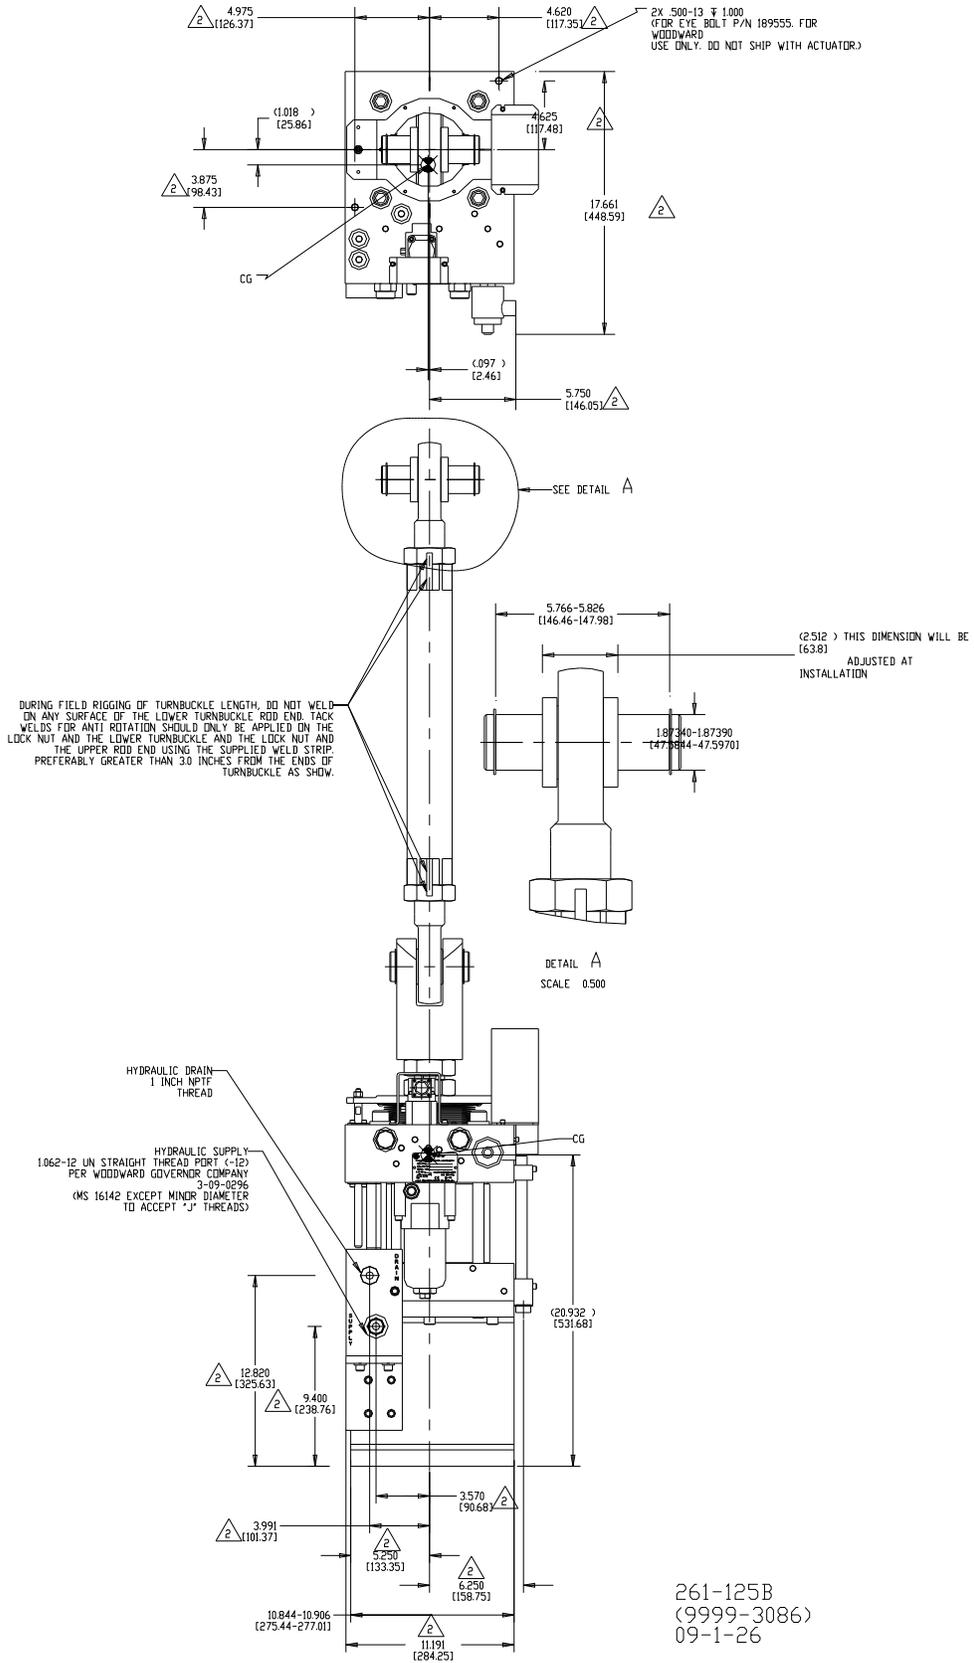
9F IGV Actuator with Electric Trip and SAE O-ring Thread Type Connection (front and top views)
